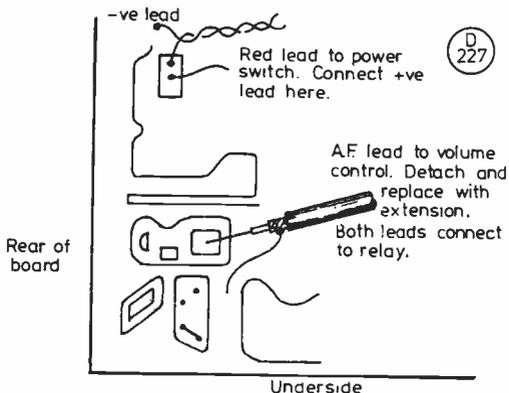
ELECTRICAL CONNECTION TO RECEIVER BOARD
